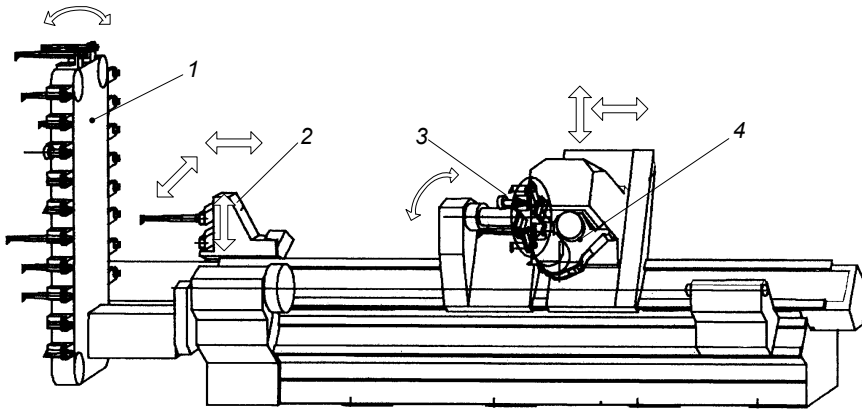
Turning and milling centre equipped with two tool stores; the main – stationary and movable – auxiliary:
